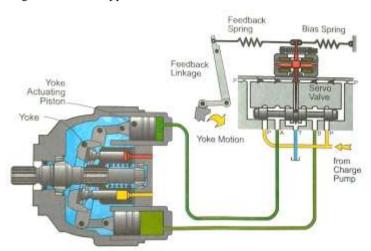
Servo pump operated with flapper-nozzle torque motor
